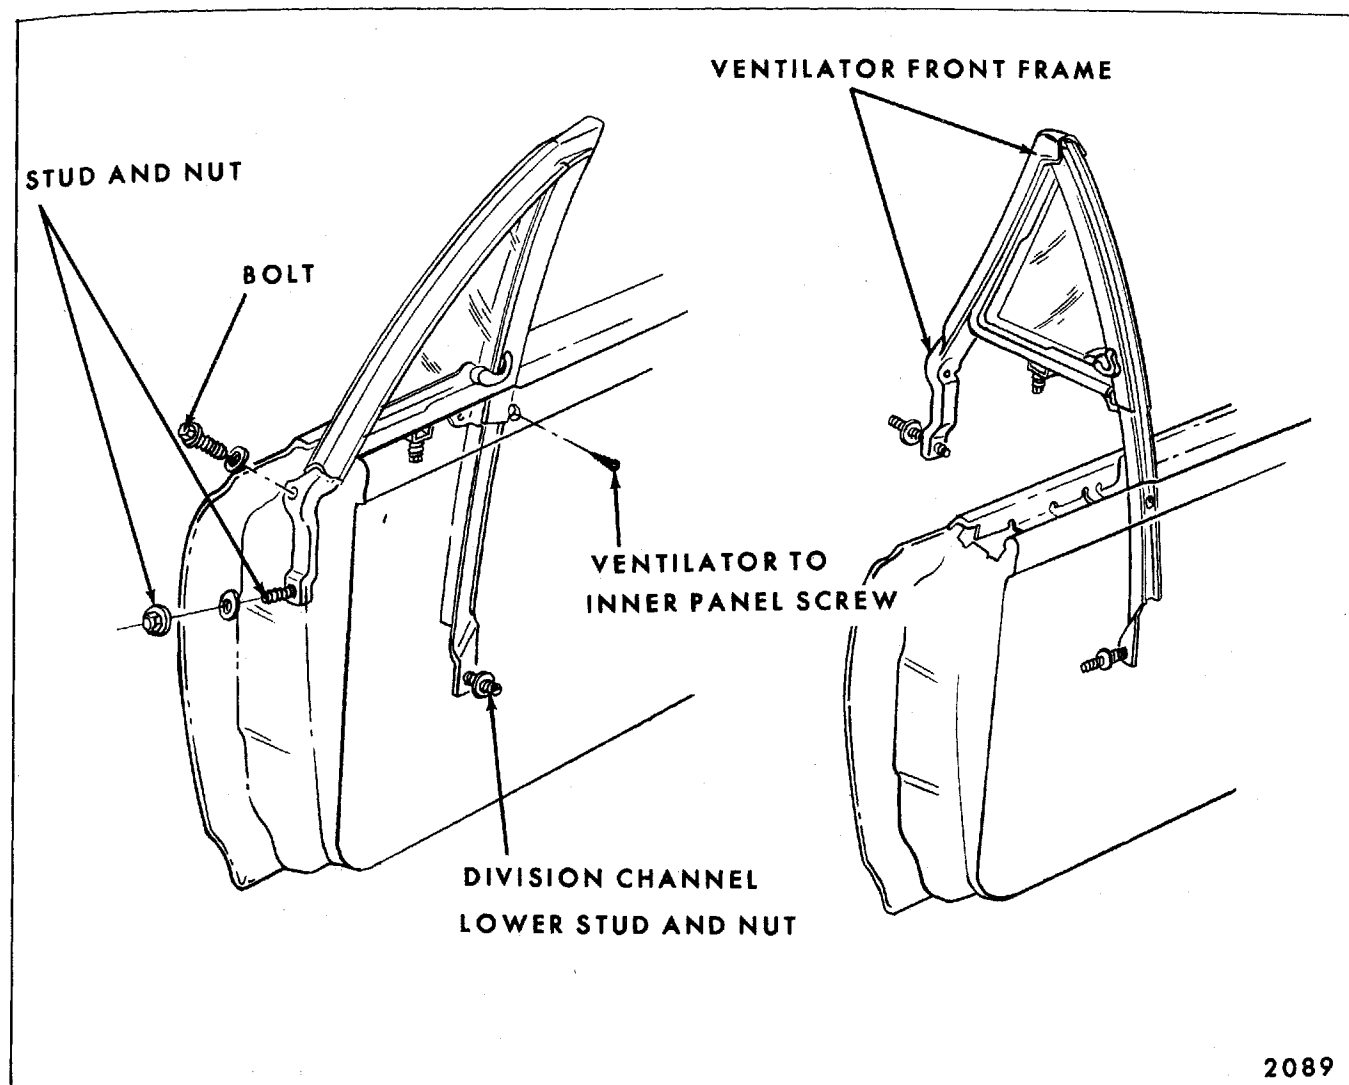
Front Door Ventilator Removal - "A" Style Shown - "X & Z" Similar
